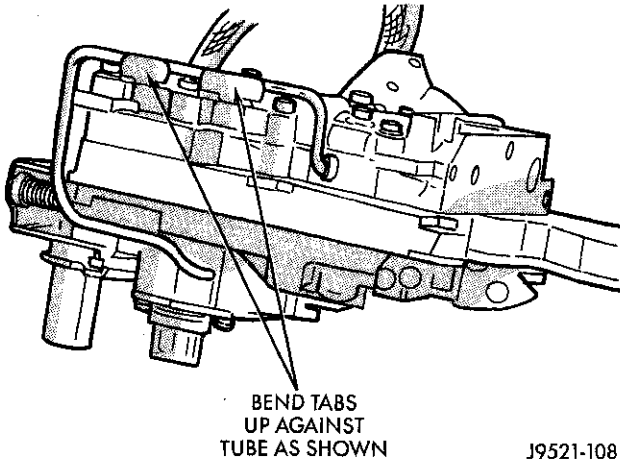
Securing Boost Valve Tube With Brace Tabs
